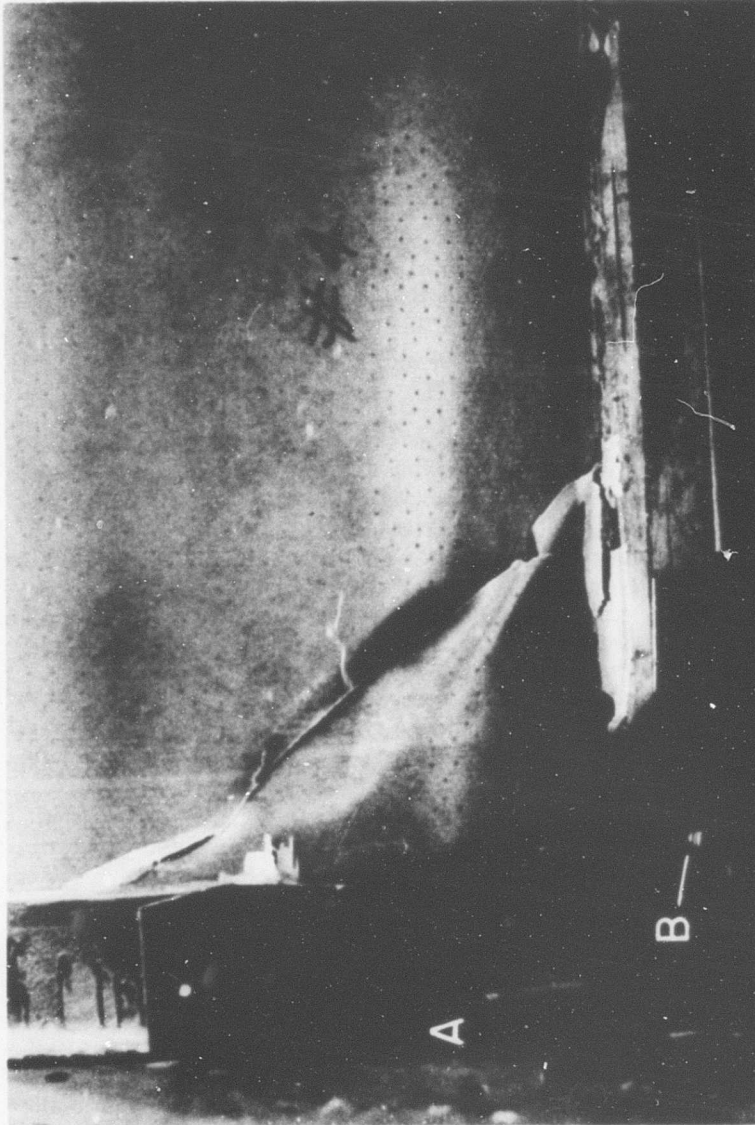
Curved-Panel Shear Failure: A, Torque Plate and Ring End-Grip; B, Tilting Pin.
